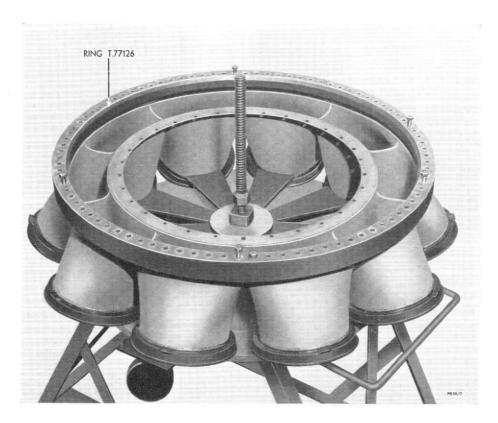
Restraining ring in position on outer flange of discharge nozzle,
